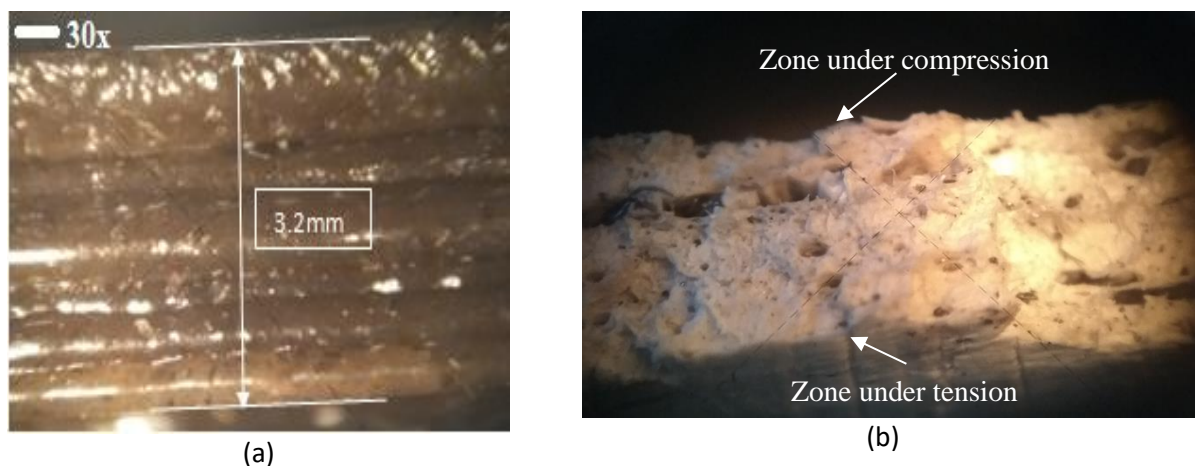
Toolmaker microscopic image for (a) 3D printed part and (b) fractured part under flexural loading as per Table 4.5
